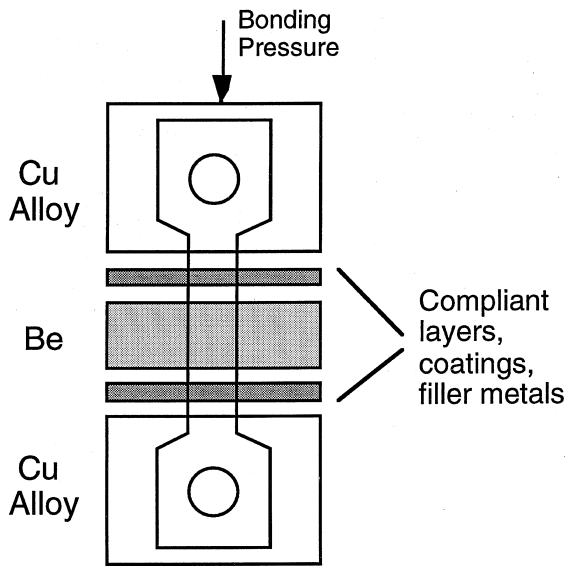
Bond assembly configuration showing orientation of specimen for transverse tensile testing.
